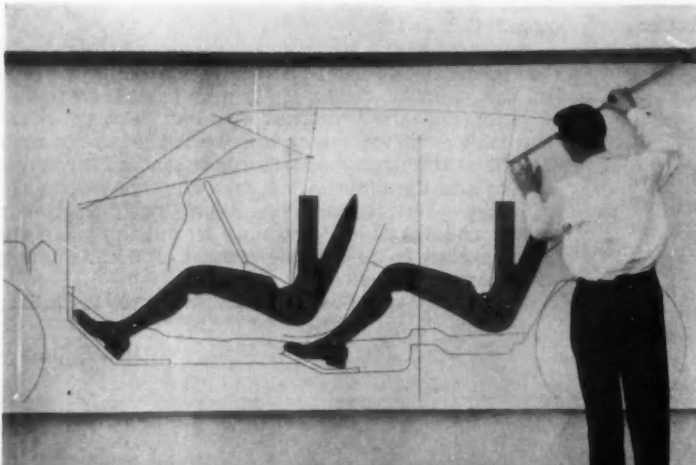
Two-dimensional, plexiglass manikin used during package design stages. Here the technical stylist is using the completed package drawing to check backlight header clearance from the rear index eye.
